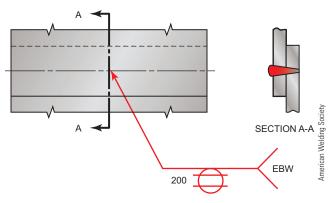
Strength of seam weld with an electron beam.
